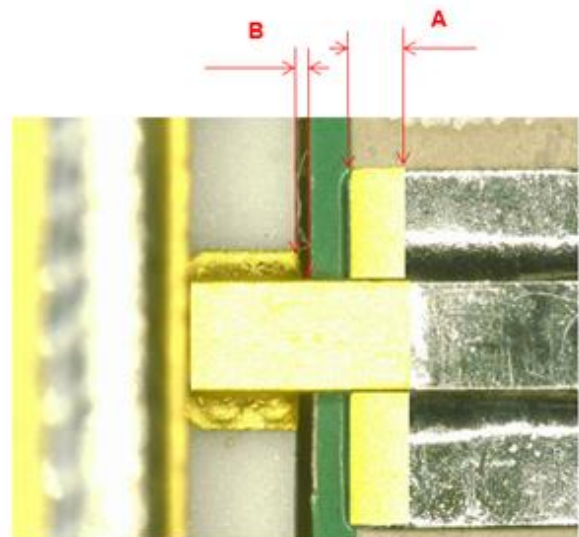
Distances A and B showing recommended solder pullback and gap between device and PCB.
